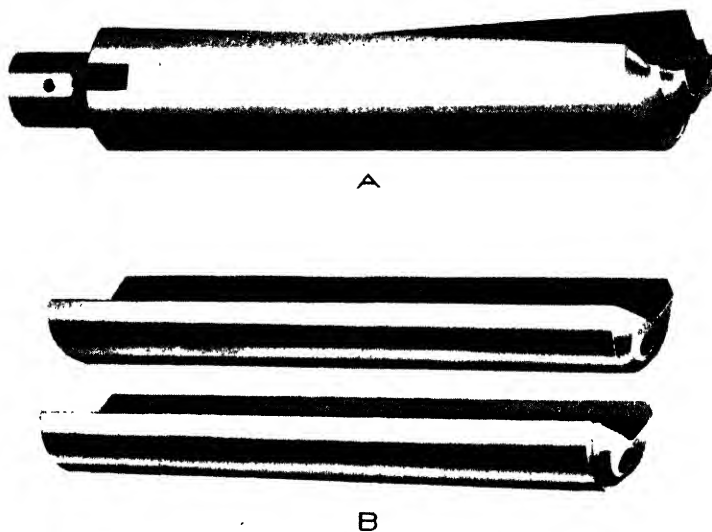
General Appearance of Drills Properly Ground for Drilling Deep Holes; Drill for Larger Holes is Shown at A, and Two Styles of Grinding for Drills of Smaller Sizes at B
